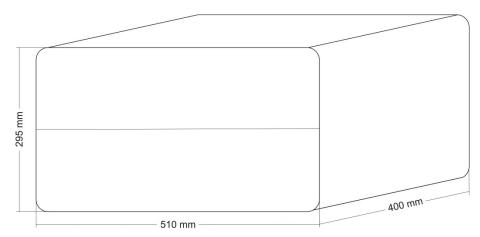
Outline drawing and dimensions of PS8000 series power supply
